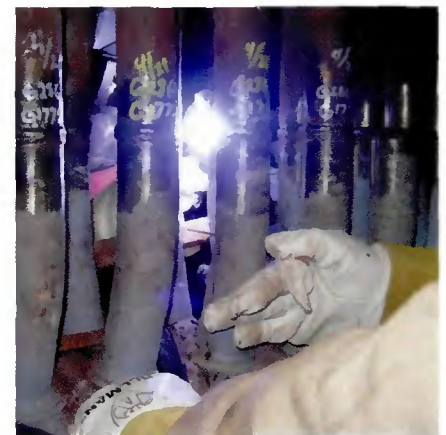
Buddy welding in motion — one welder welds as far around the tube as possible, and with a smooth transition at the break, the other welder picks up the welding on the back side.
